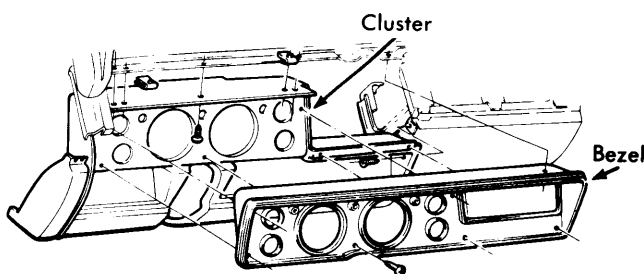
Exploded View of GT Instrument Panel Cluster — Vega & Astre
